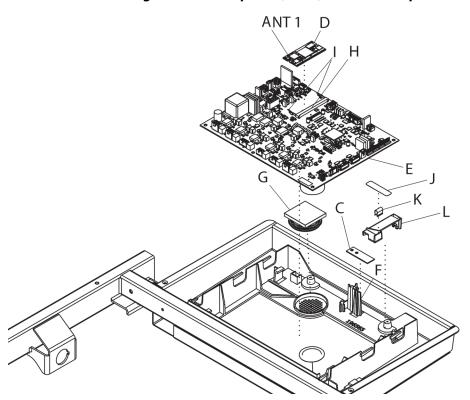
MCB Speaker, SOM, and WiFi Components
